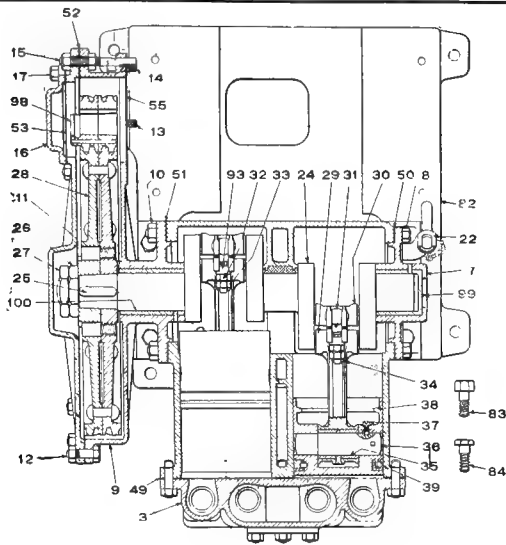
Compressor Portion of Motor Driven Air Compressor for Electric Cars.
